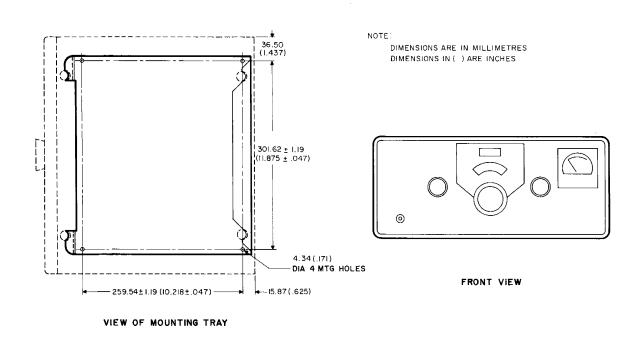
51S-1/1A Receiver, Outline and Mounting Dimensions
